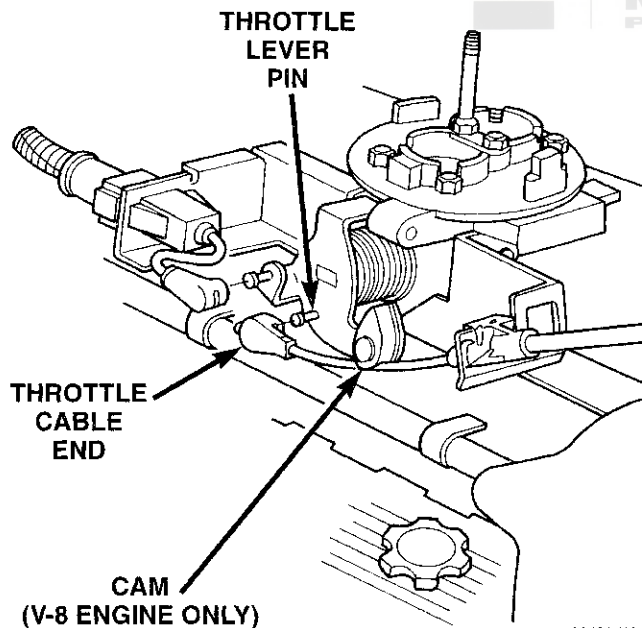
Throttle Cable at Throttle Body—3.9L/5.2L/5.9L Engines—Typical
